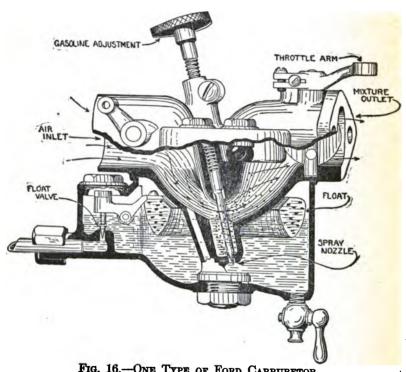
ONE TYPE OF FORD CARBURETOR
